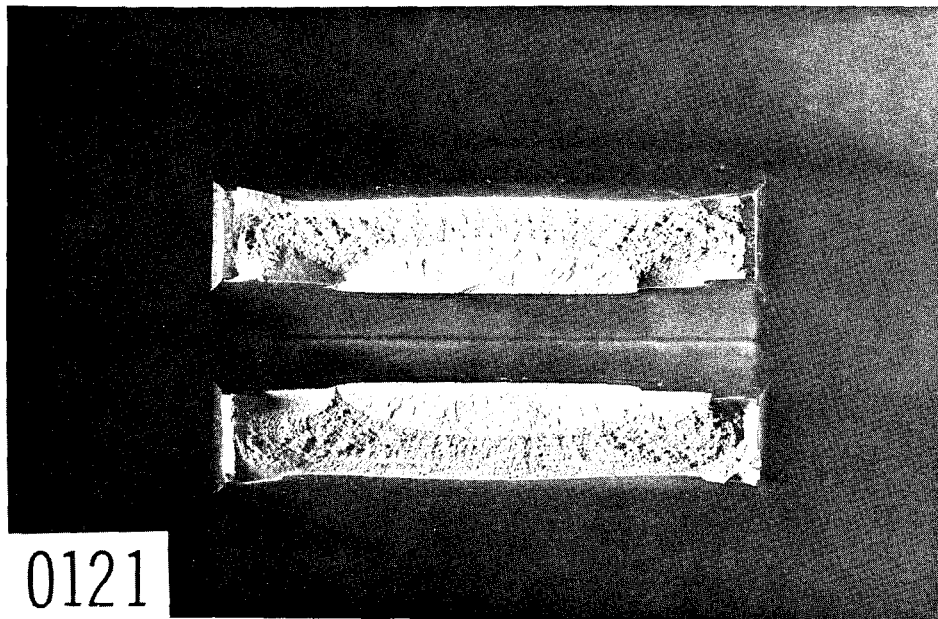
Lehigh fatigue specimen fracture surface in HY 80 steel. 1X.
